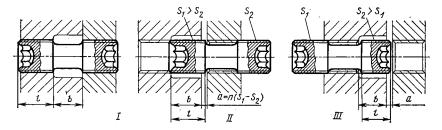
Assembling with differential-thread bolt 4—after assembly; II—before assembly; III—before assembly (alternative assembly sequence)
